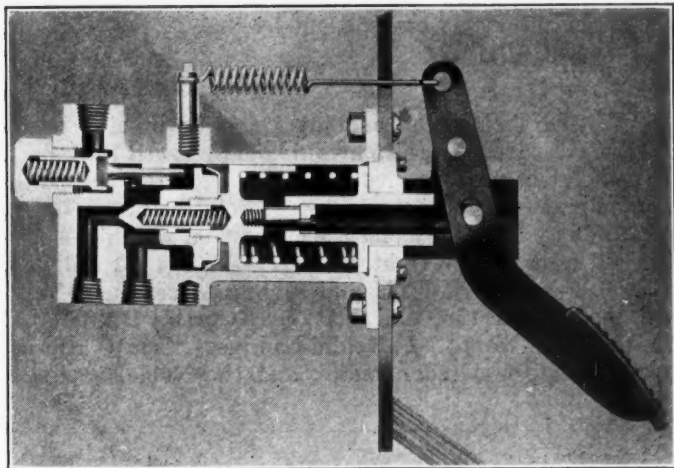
Foot valve in which internal pressure of brake line balances foot pressure due to action of large helical spring
